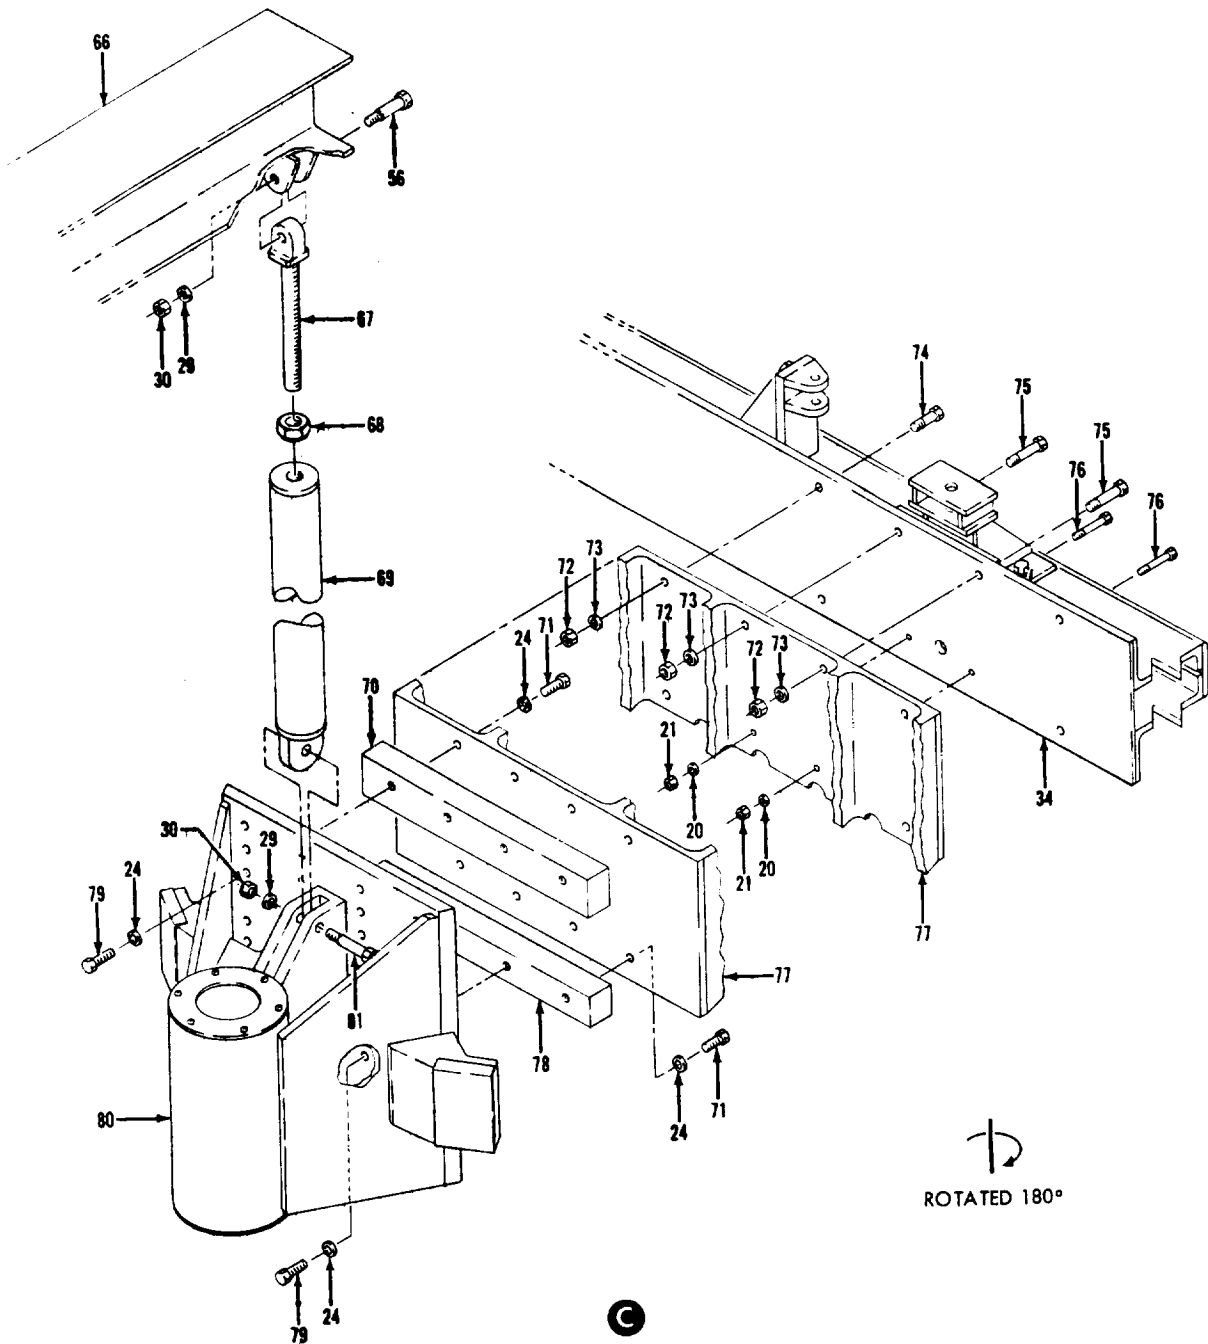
LES Coupler Assembly (Sheet 4 of 9)
